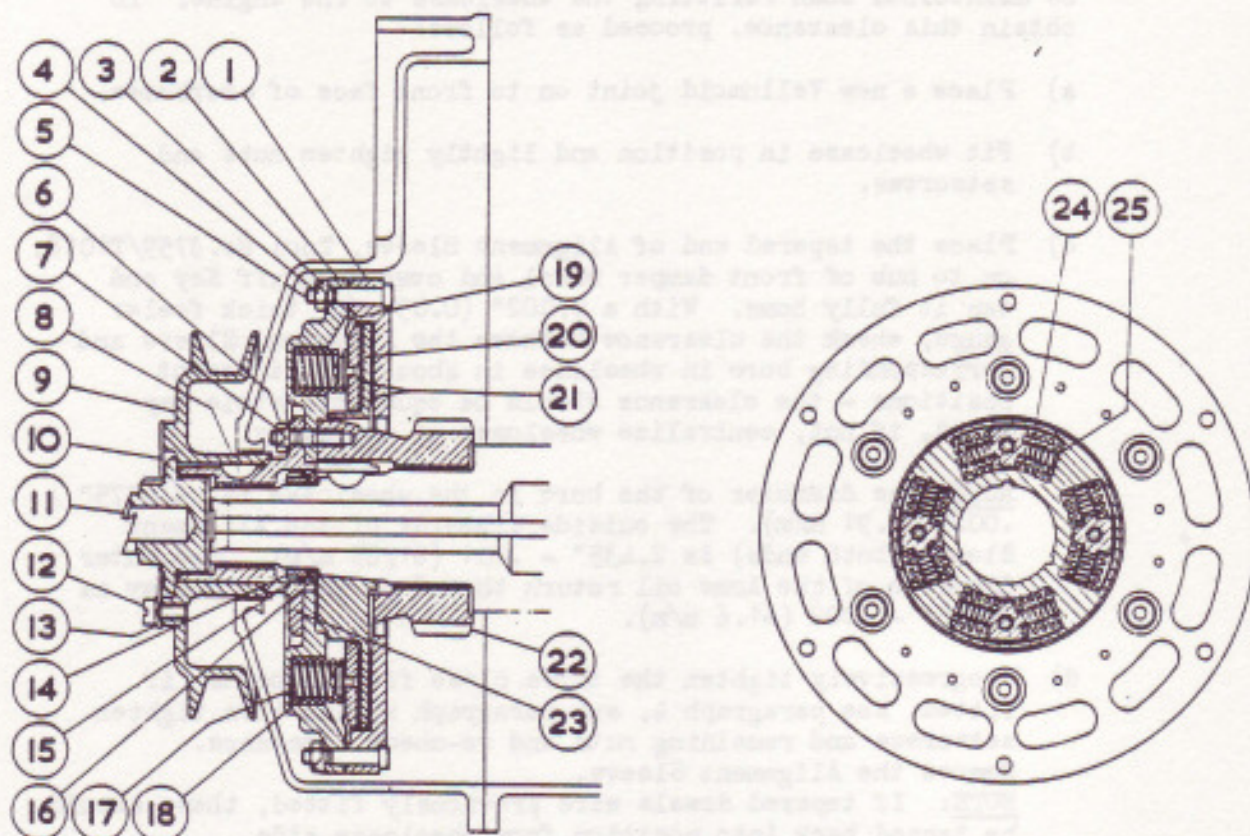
SECTION - SPRING DRIVE ("BENCH" TYPE).
